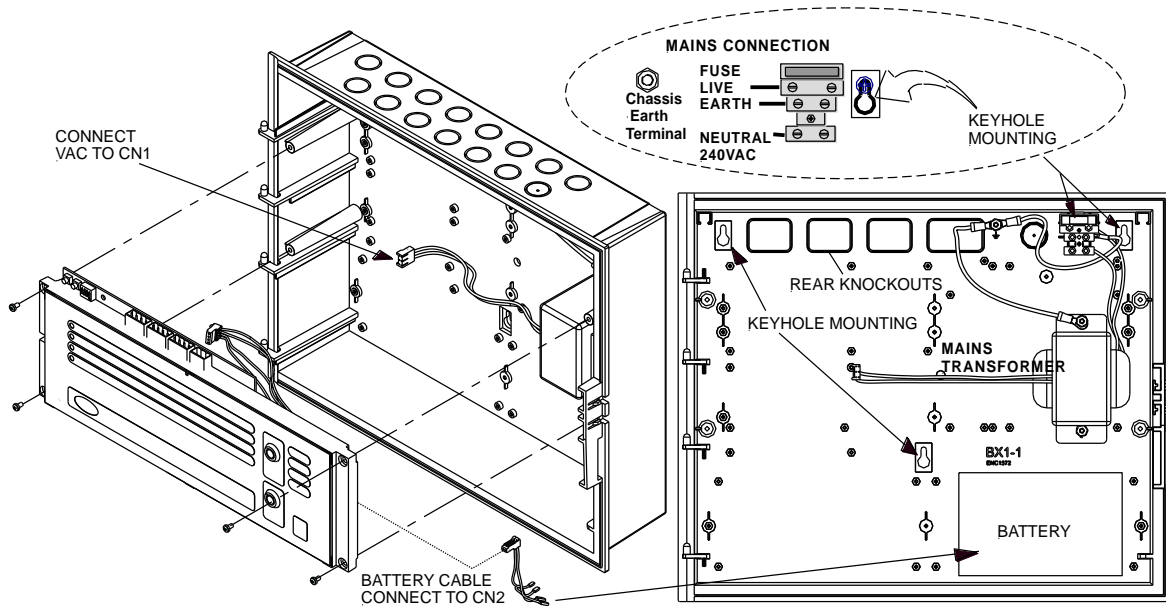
Assembly and Back box Layout and Mains Wiring (BX1)
